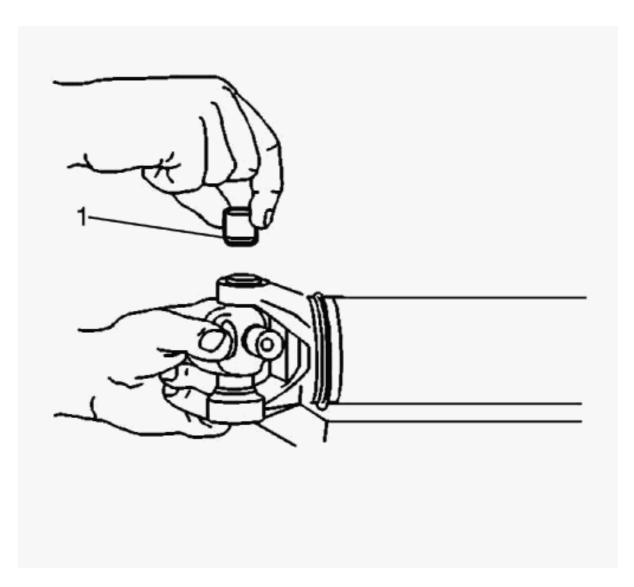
Installing Bearing Cup Into Yoke Ear Courtesy of GENERAL MOTORS COMPANY
